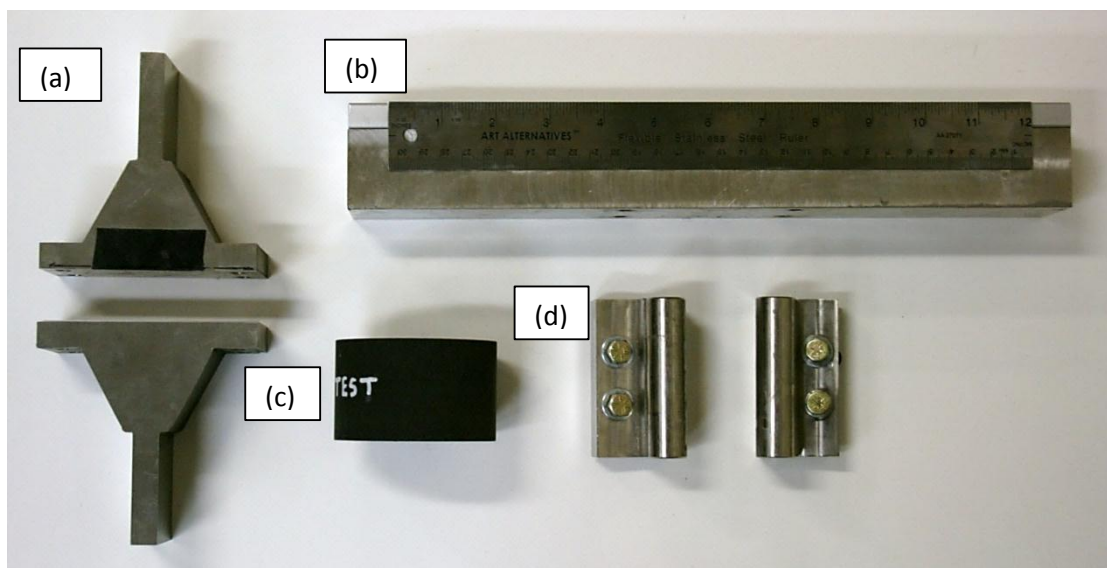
Three point bend test fixtures (a) hardened steel compression platens (b) stainless steel beam (c) hard rubber foam projectile analogue (d) 19.05 mm diameter rollers and mounts
